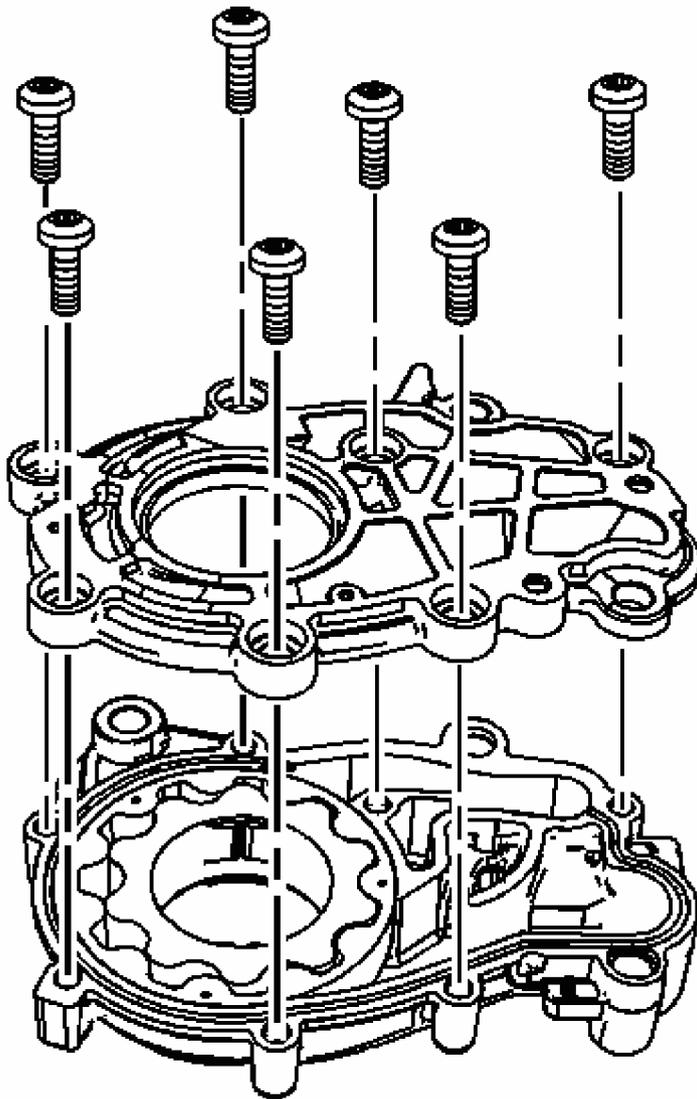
Identifying Bolts Holding Oil Pump Cover To Oil Pump Housing
